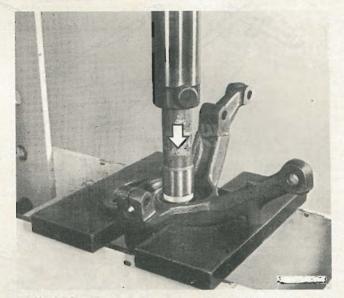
Pressing the hub from the front wheel bearing (Sec 3)
